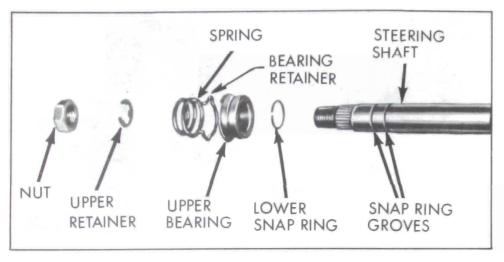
Steering Shaft Upper and Lower Snap Rings
